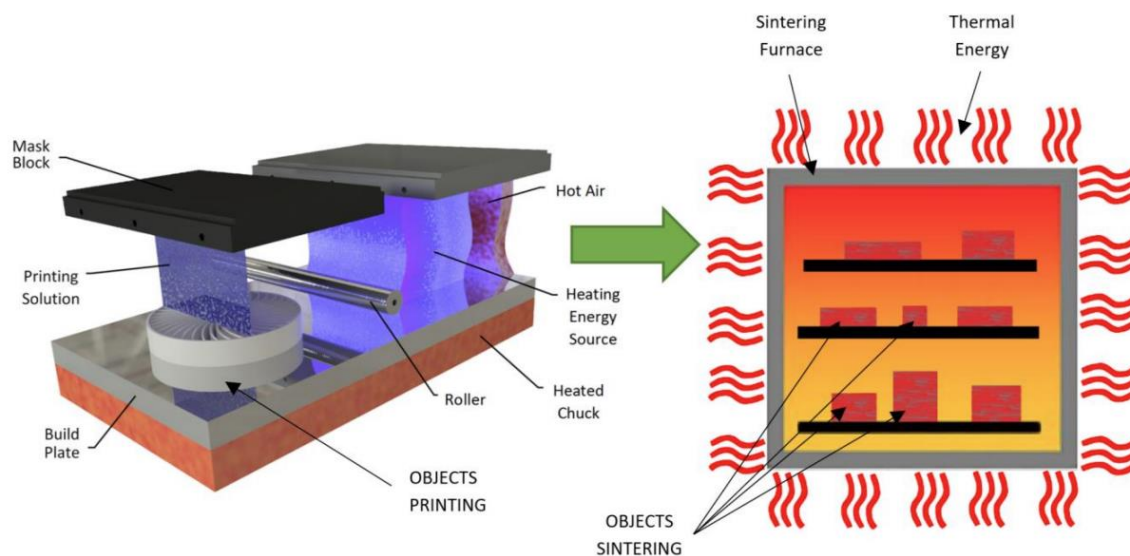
Schematic of Metal Material Jetting Additive Manufacturing process, consisting of 3D printing.
